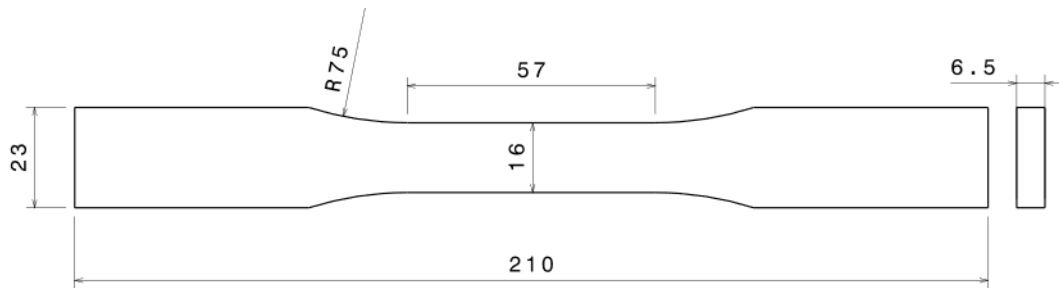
Dimensions of the dogbone specimen. All dimensions are in mm.
